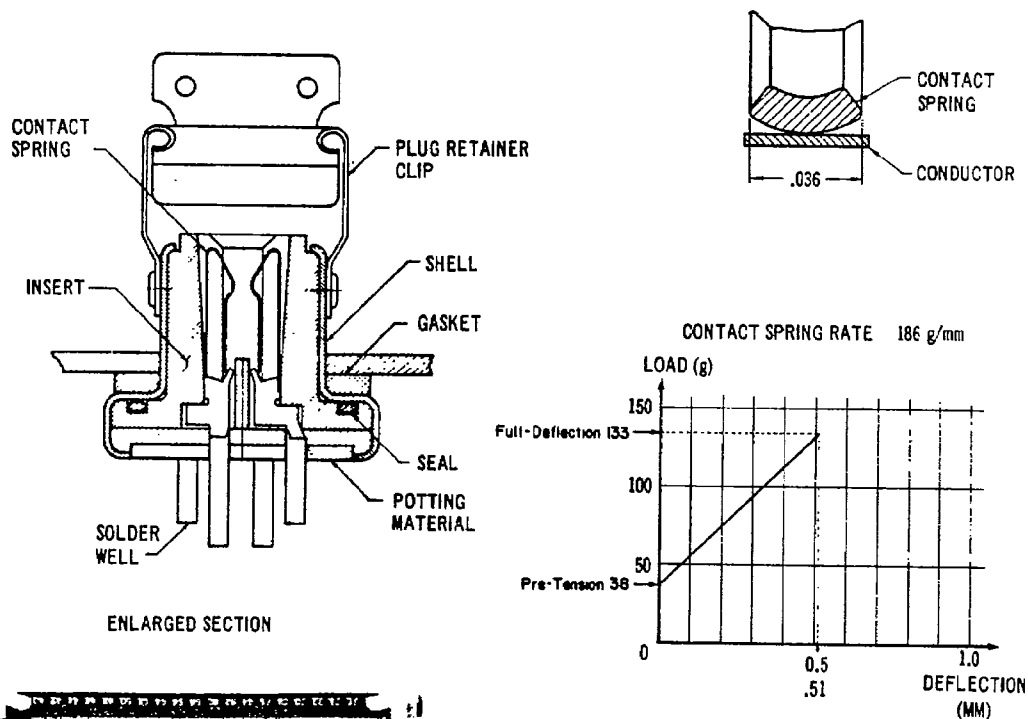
MIL-C-55544/5 Premolded rectangular plug.
